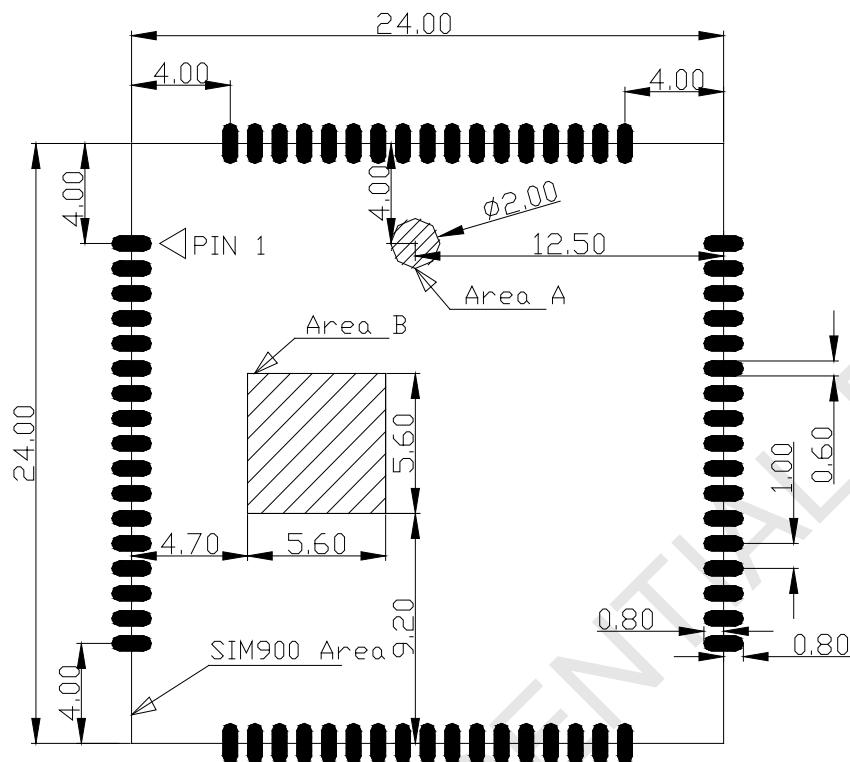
SIM900 Recommended PCB footprint outline (Unit: mm)
